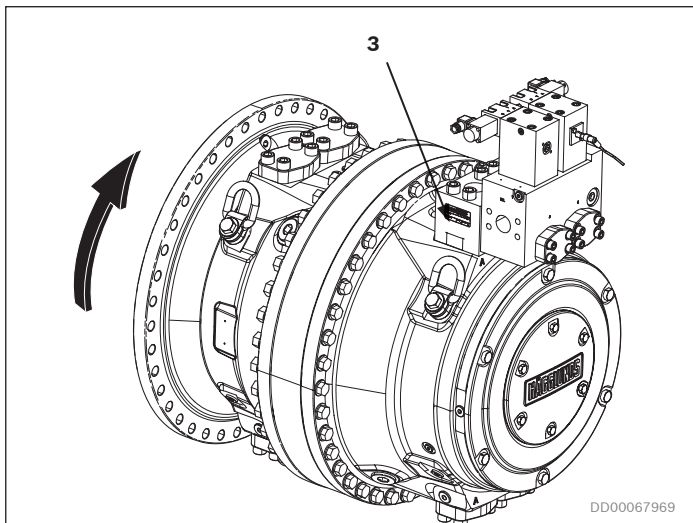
CBP valve mounting position for counter clockwise drive shaft rotation as viewed from motor shaft side. INL (A1) port on valve connected to A port on motor
